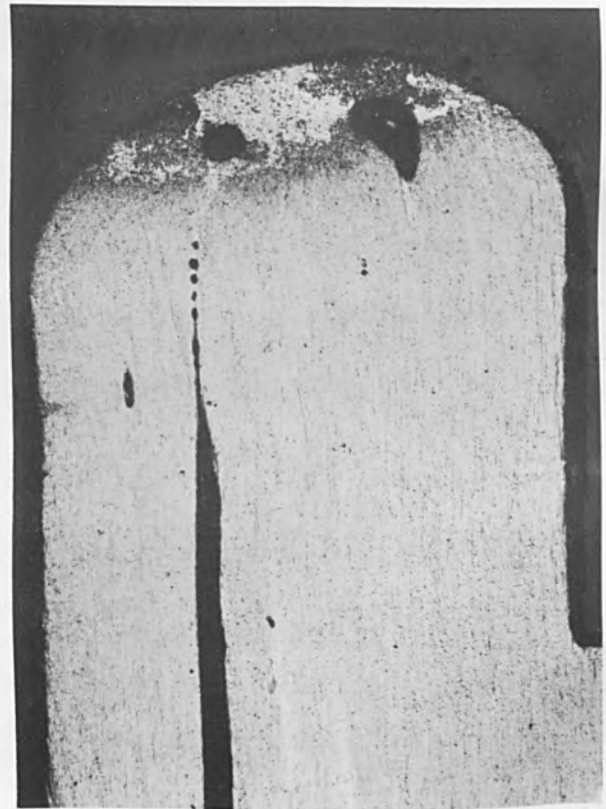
Undegassed S.A.P. after electron beam welding - Otto Fuchs material.
